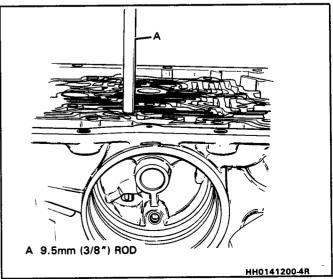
Installing Third Accumulator Retainer and Ball Assembly
